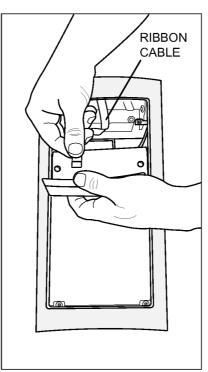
Dispenser Control Panel Removal, Disconnect Ribbon Cable
